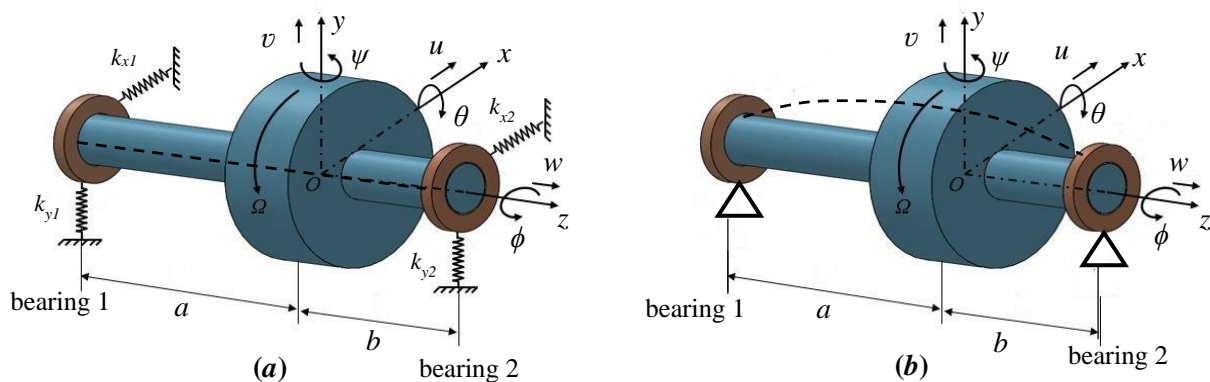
Simple Jeffcott rotor model a) with a rigid shaft on flexible bearings b) with a flexible shaft on rigid bearings
